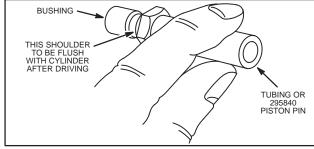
INSTALLING PLUNGER AND BUSHING
